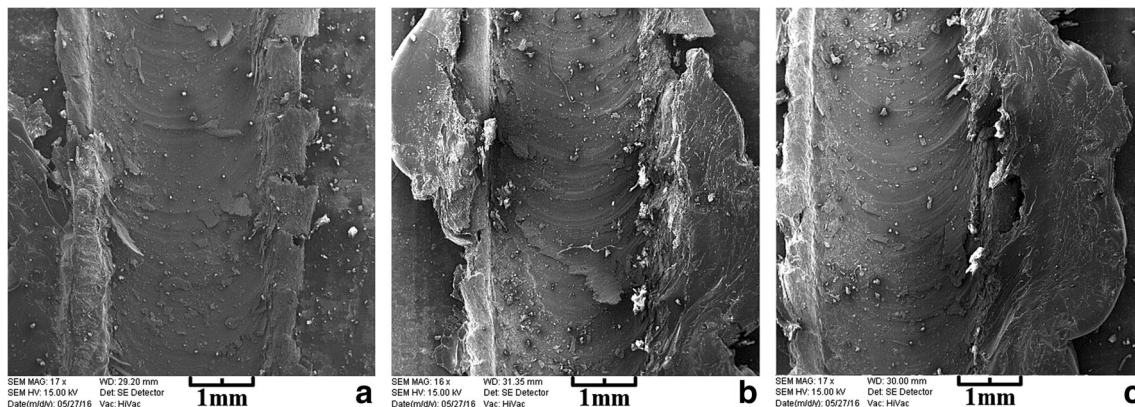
Fracture surface appearances of the dissimilar FSWed joints with a tool tilt angle-plunge depth combination of 0° – 0.1 mm (a), 2° – 0.2 mm (b), and 2° – 0.4 mm (c)
